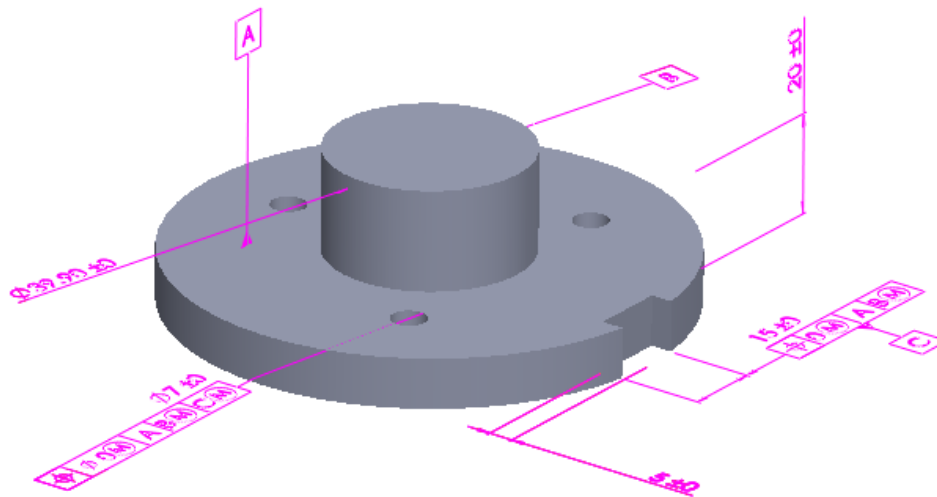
38: The Cap with Size Tolerance Frames Added
